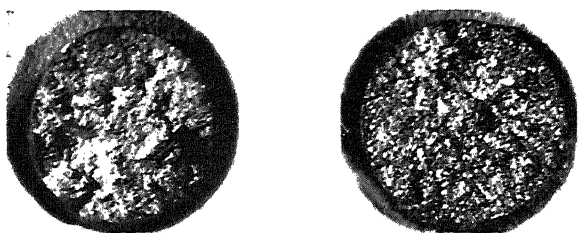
TEST-BAR FRACTURES, MUZZLE AND BREECH OF FORGING 1351 UNTREATED.
